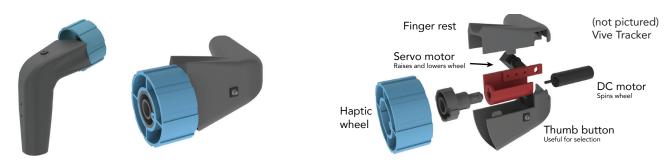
(left) 3D model of Haptic Revolver with a textured wheel attached. (right) Exploded view showing internal components. A servo motor raises and lowers the wheel, while a DC motor spins the wheel to render motion and shear forces. A button on the side allows the user to select objects and navigate. The VIVE tracker (not shown) enables 6-DOF spatial tracking of our device
